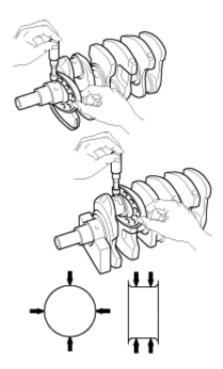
Measuring Diameter Of Main Journal And Crank Pin Courtesy of HYUNDAI MOTOR CO.
